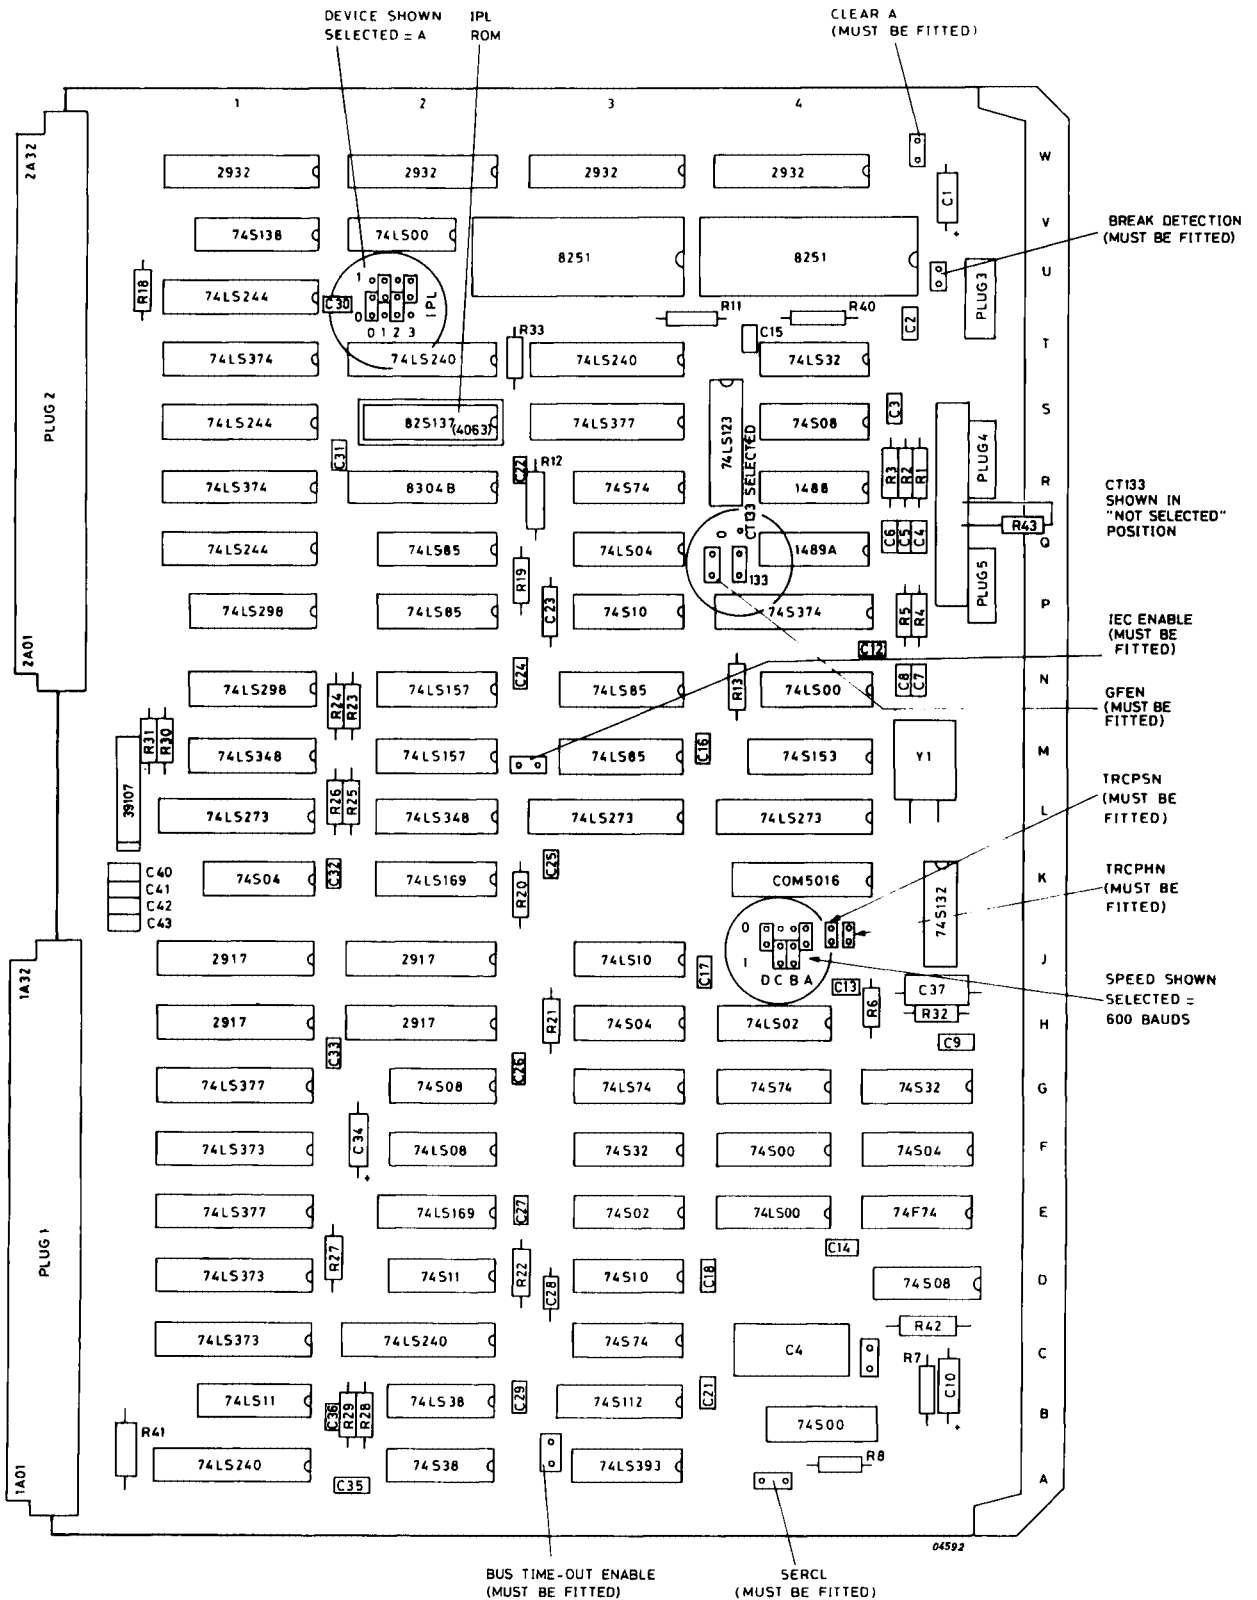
C7E2B COMPONENT LAYOUT AND LINKS
